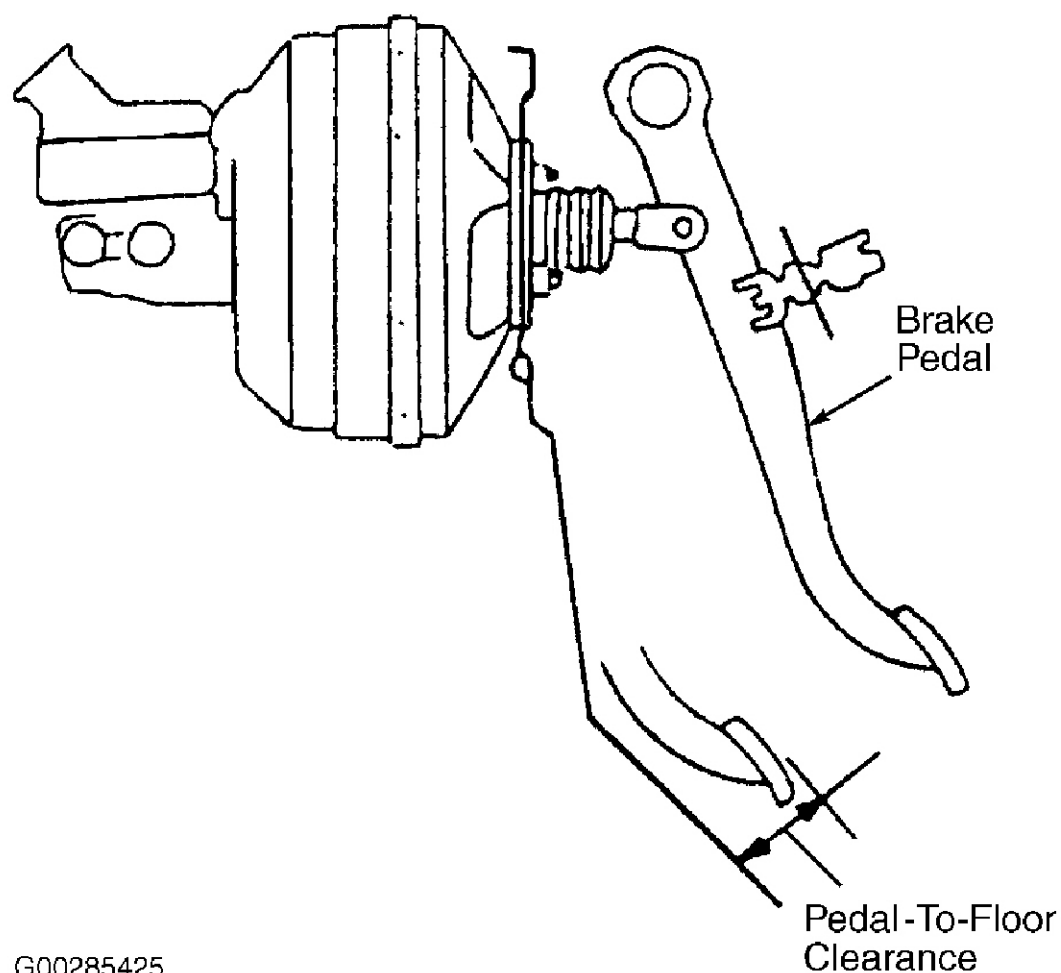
Adjusting Brake Pedal-To-Floor Clearance
